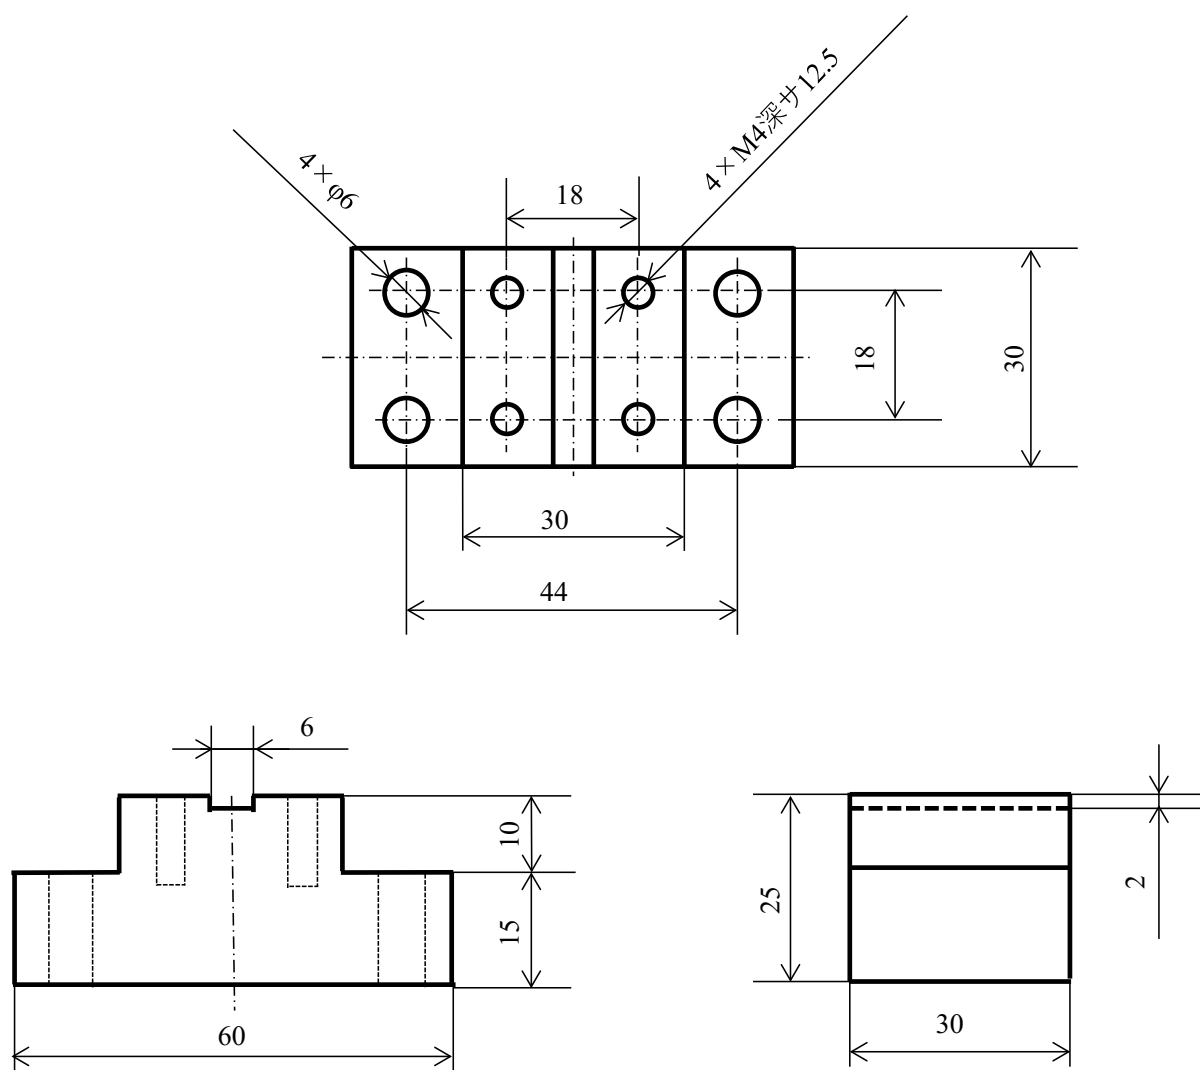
Schematic illustration of jig A for restricted side and bottom part (Unit: mm).
